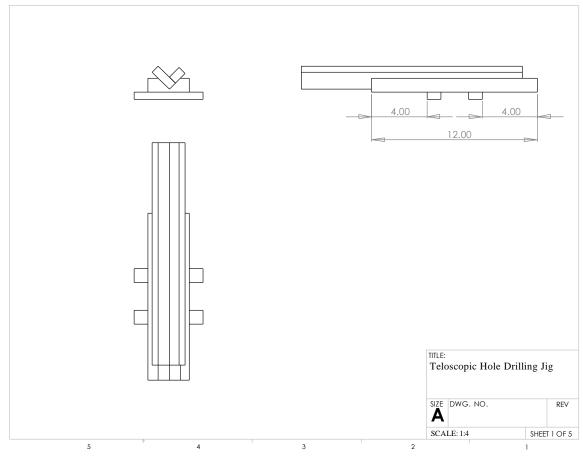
Construction Jig and Location of 1 in x1/2 in Clamping Surfaces.
